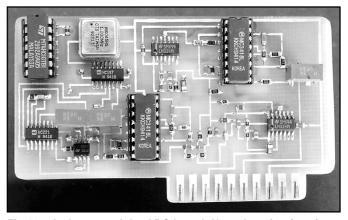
A close-up of the ADC board. Note the mix of surfacemount and traditional components used. Some of the boards have components on both sides.
